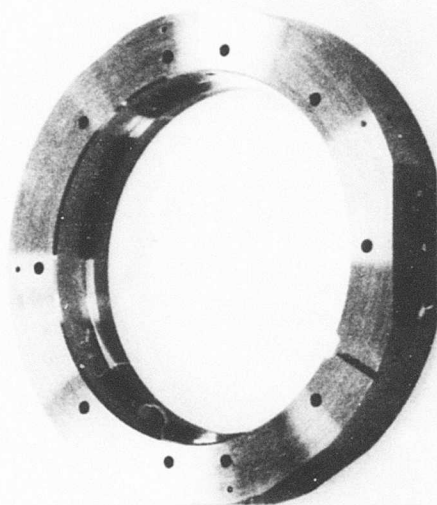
Inner Races or Inner Race Supports for Test Bearings.
